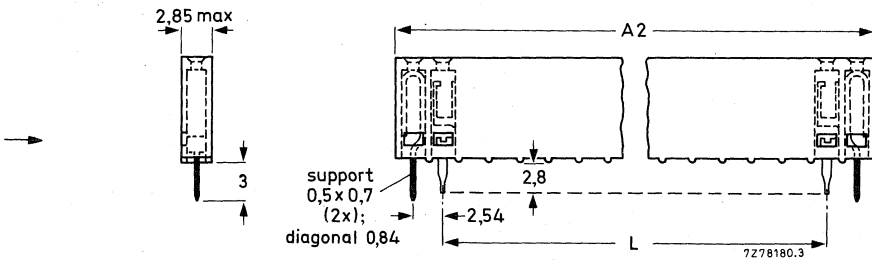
Panel socket, single row. Dimensions are identical with those in Fig. 5 except as shown. See Table 2 for dimensions A2 and L.
